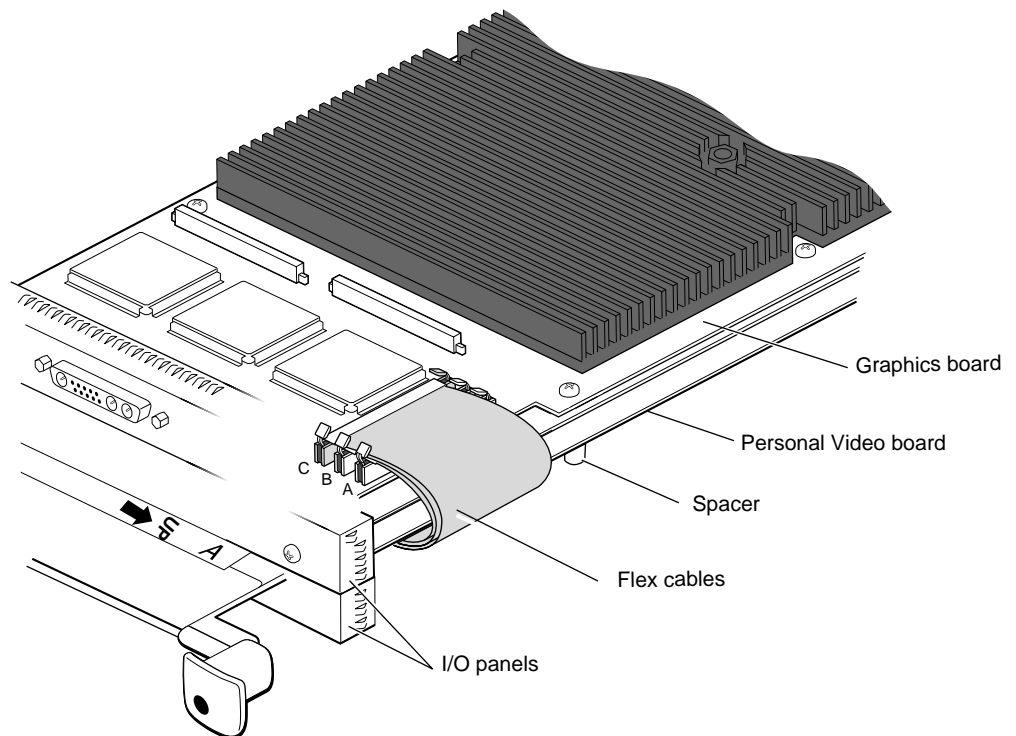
Attaching the Flex Cables to the Graphics Board
